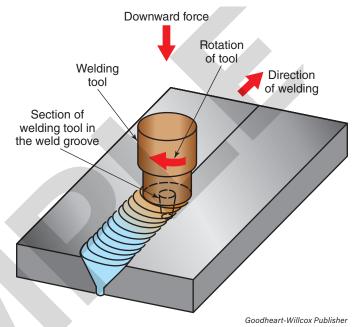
Friction stir welding (FSW). The friction stir welding tool is rotated at high speed, creating the heat to bring the joint to a plastic state. FSW welds are very clean and strong.
